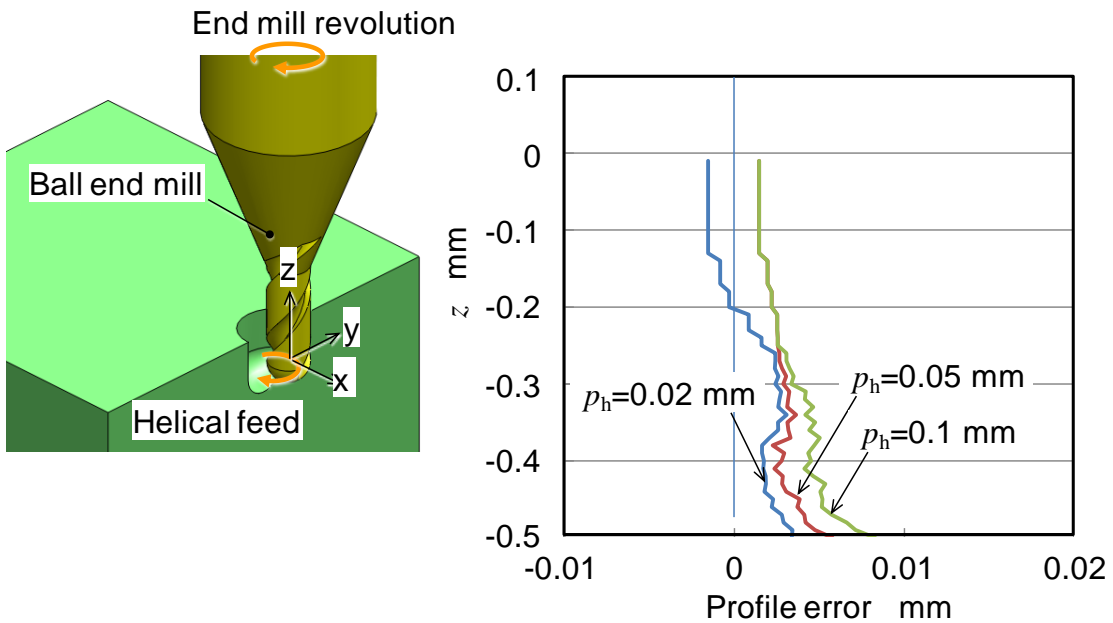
22 Relationship between helical feed pitch p_h and Profile error of the machined surface for CW (Up milling), flank wear $VB=0.01\text{mm}$, and helical feed radius $R_o=0.4\text{mm}$.
